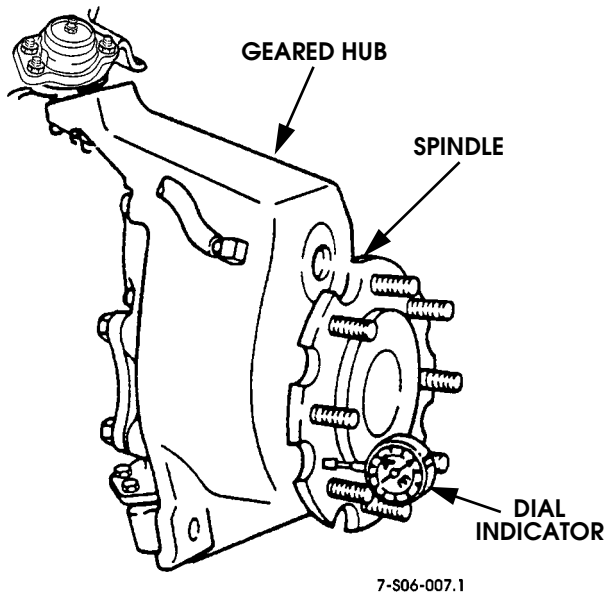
Geared Hub Spindle Runout Inspection
